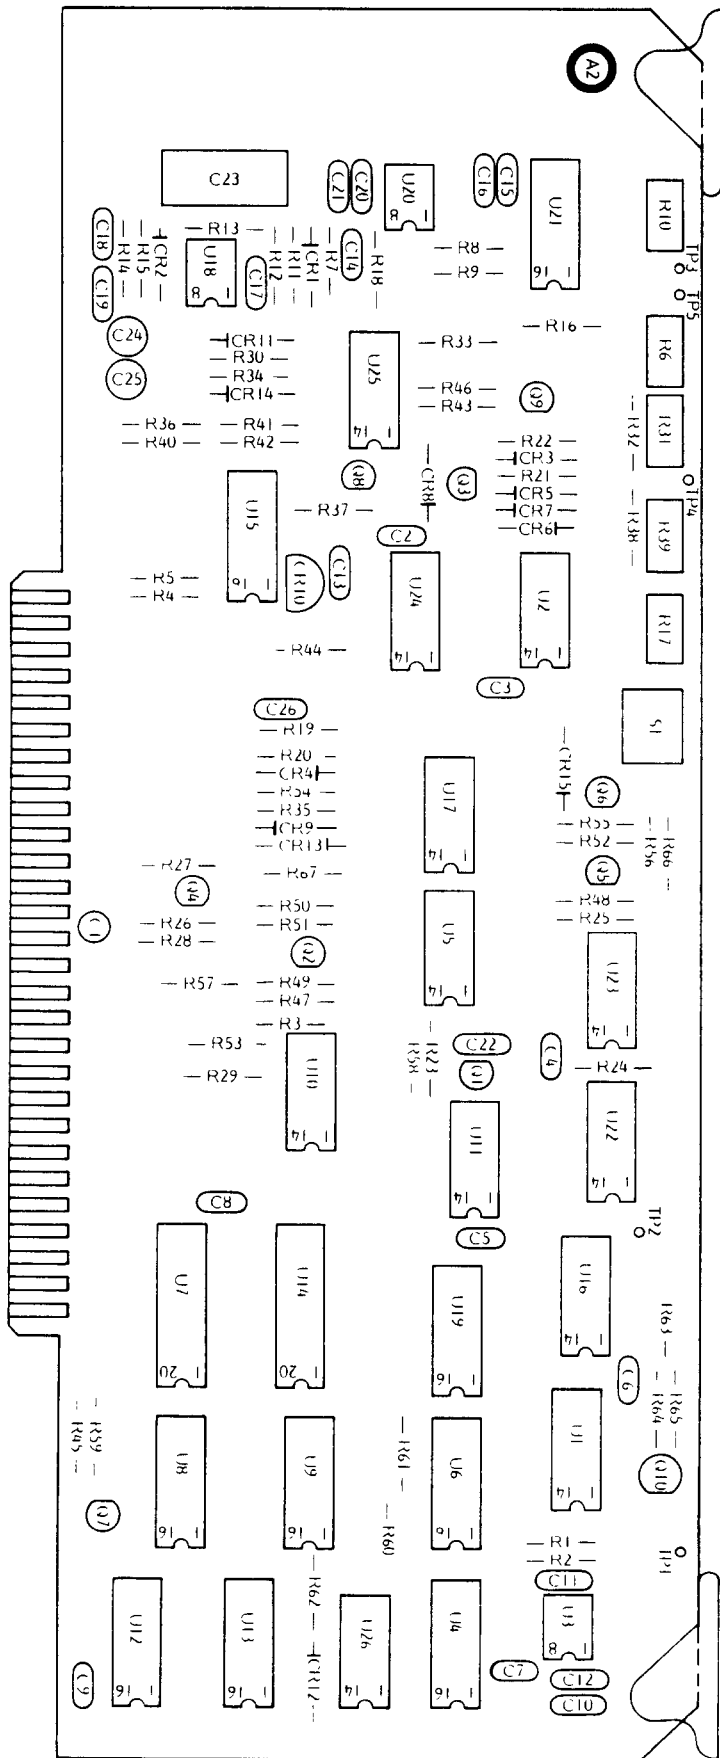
A2 Ramp Generator PCB Schematic (Sheet 3 of 3)
